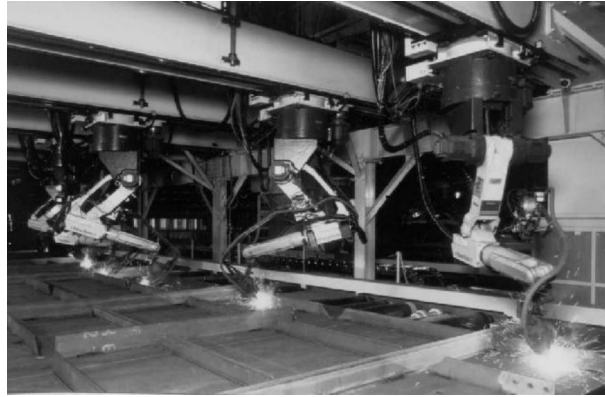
Welding robots with multi-joints in bridge factory
